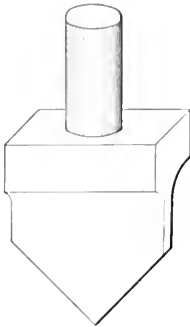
A Die for Cutting Silver Blanks without Waste.
